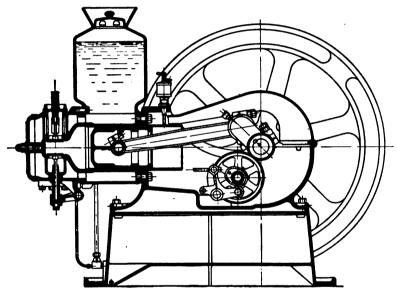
Hopper-cooled Engine. Seager Gas Engine Works.
